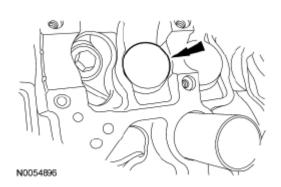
Locating Valve Tappets Courtesy of FORD MOTOR CO.
